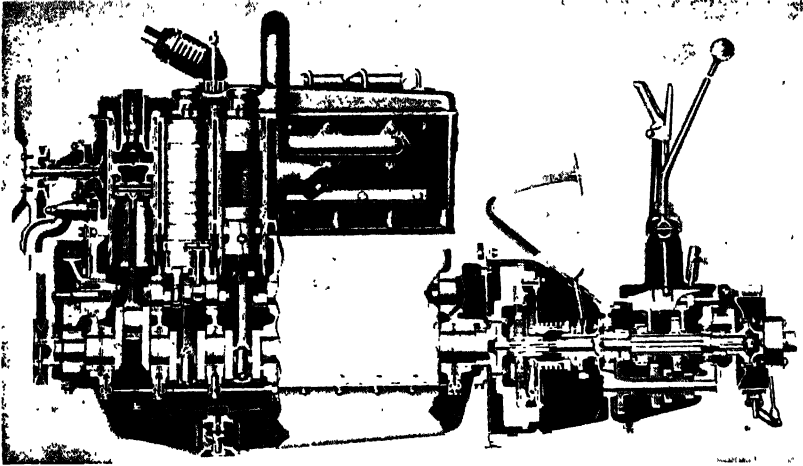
Sleeve-valve Engine. (Willys-Knight—Six.)
